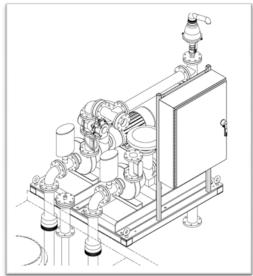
Skid-Mounted Vacuum Assist Dry-Prime Pumps
